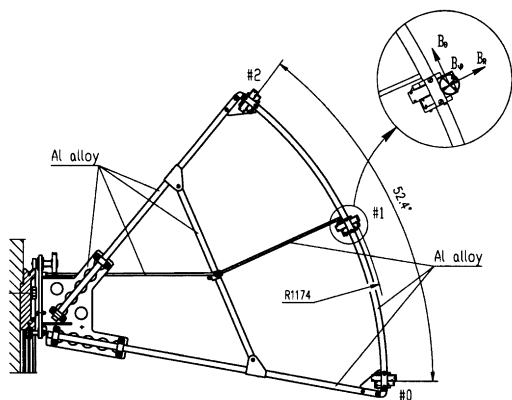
Side view of the mechanism. The location of probes is at the PMT faces with #0 the closest to the beam and #2 the furthest.
